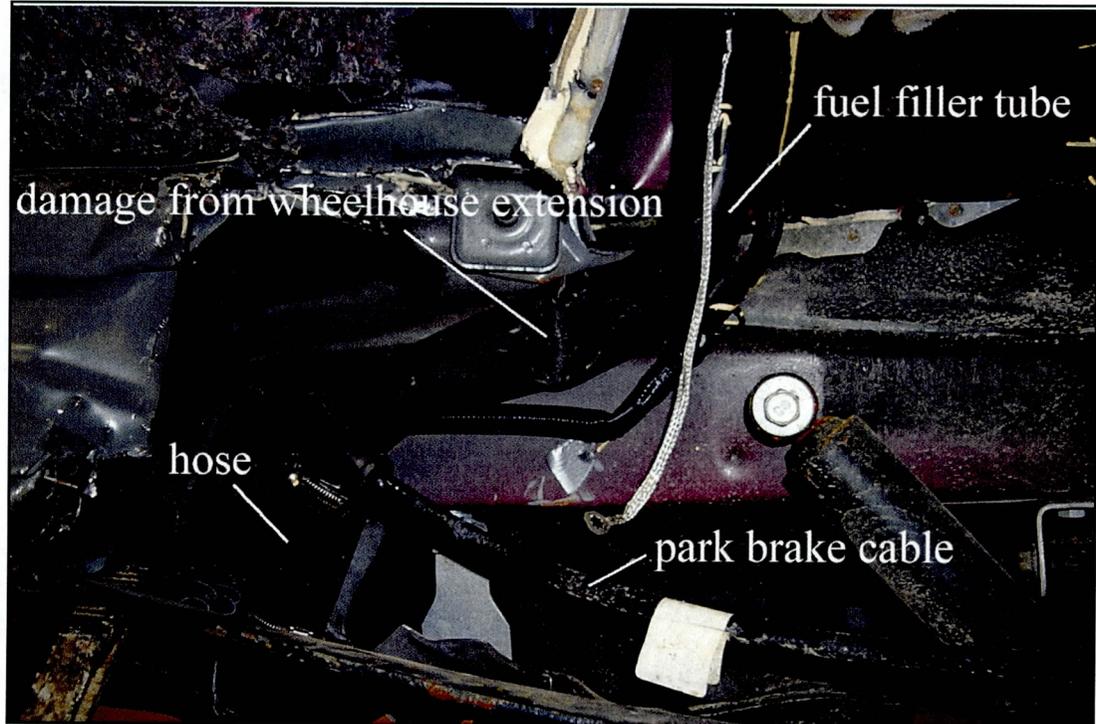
Filler Neck Assembly Position/Damage (CX0305) - Side View, Body Sheet Metal Removed.
